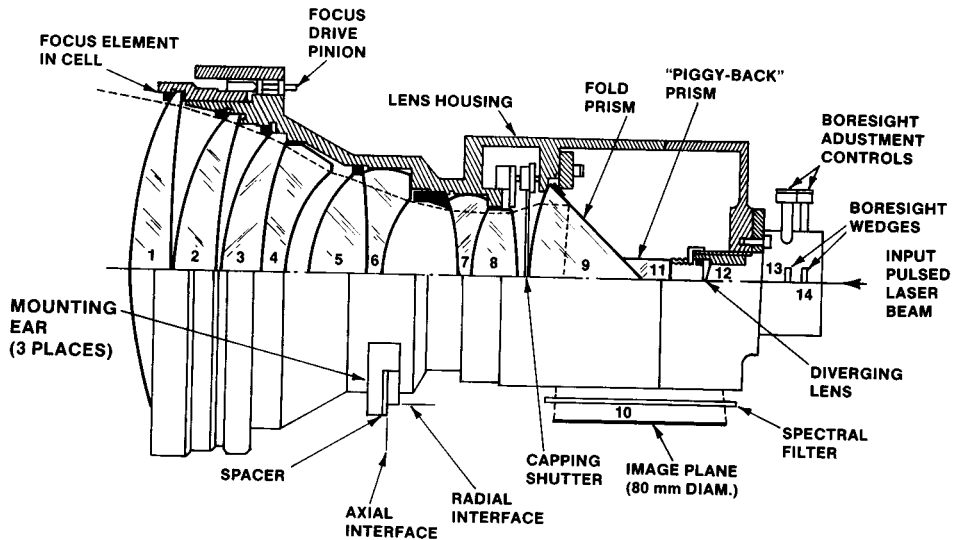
Sectional view of a lens assembly featuring several lenses with spherical rims assembled with small radial clearance by the “lathe assembly” technique. Shaded components are retainers. (From Yoder, P.R., Jr. 1986. *Contemporary Optical Instrument Design, Fabrication, Assembly and Testing*, SPIE Proc. Vol. 656, Beckmann, L.H.J.F., Briers, J.D., and Yoder, P.R., Jr., eds., p. 225.)
